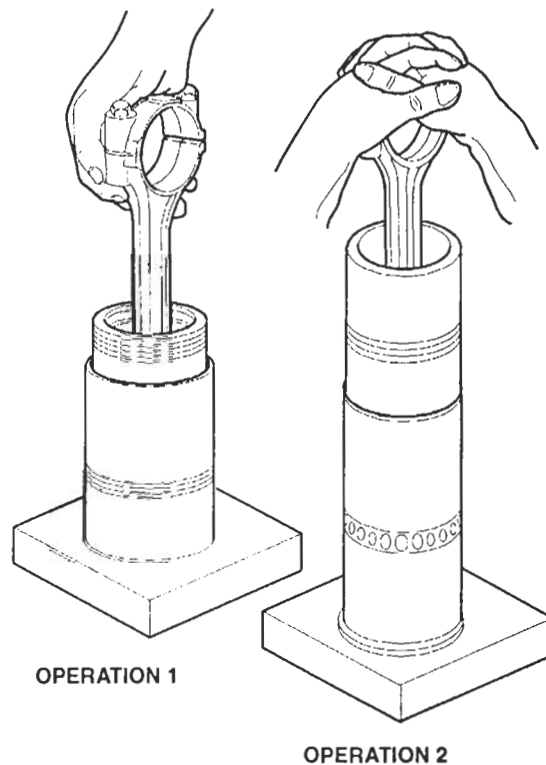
Piston and Connecting Rod Assembly in Ring Compressor and Cylinder Liner
